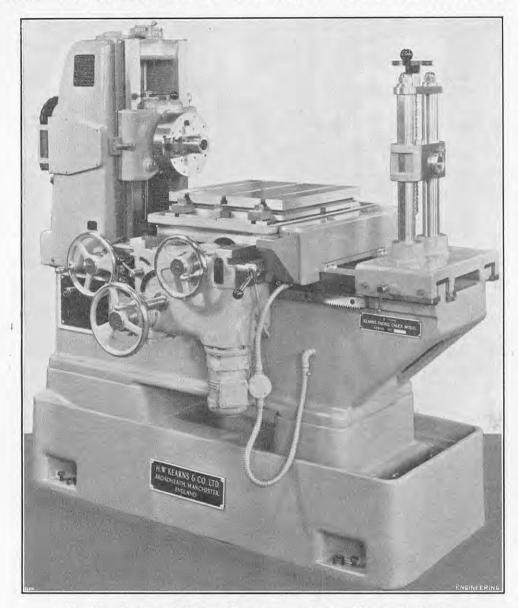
Tool-Room Boring Machine with Optical Measuring System; H. W. KEARNS & Co., LTD.
